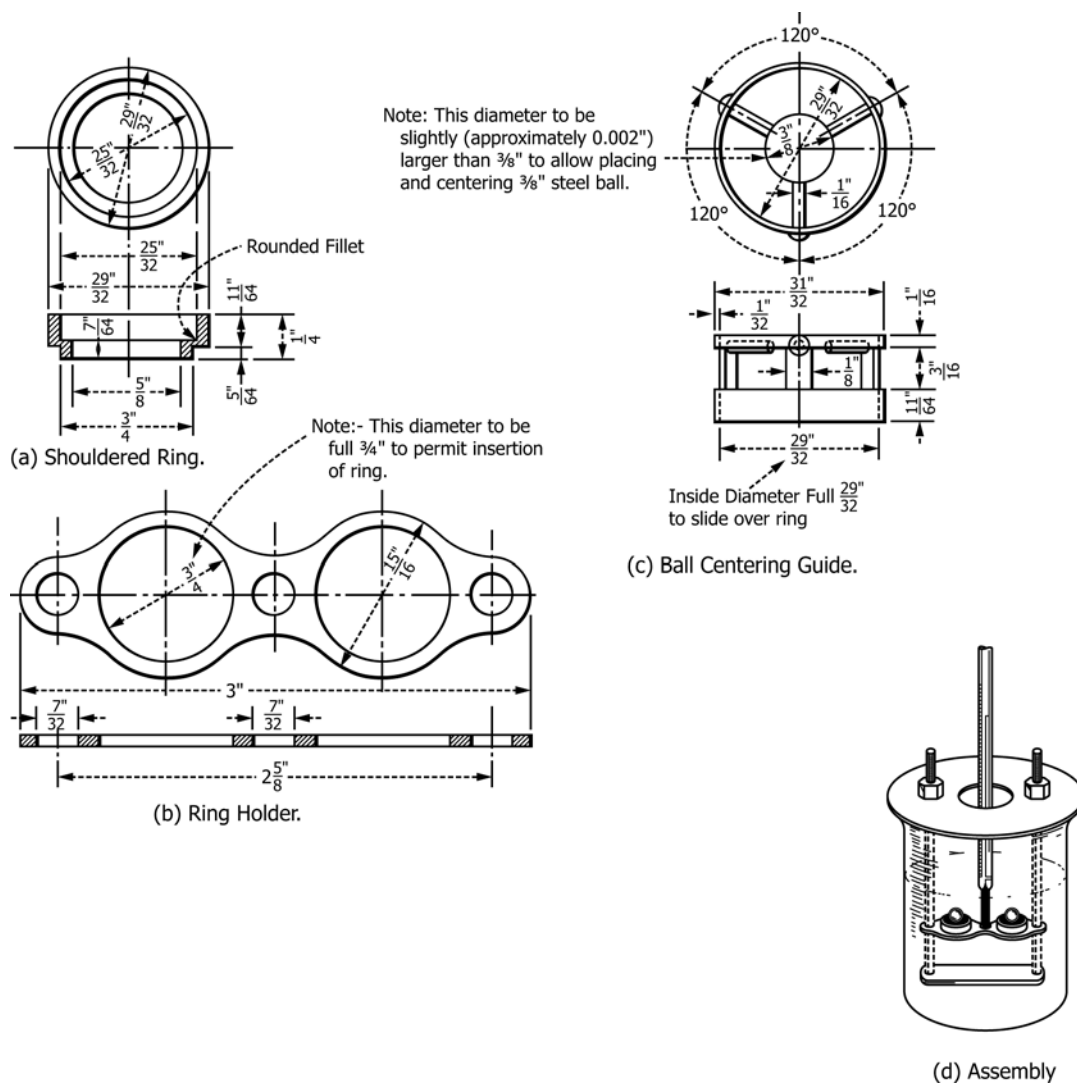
Shouldered Ring, Ring Holder, Ball-Centering Guide, and Assembly of Apparatus Showing Two Rings
